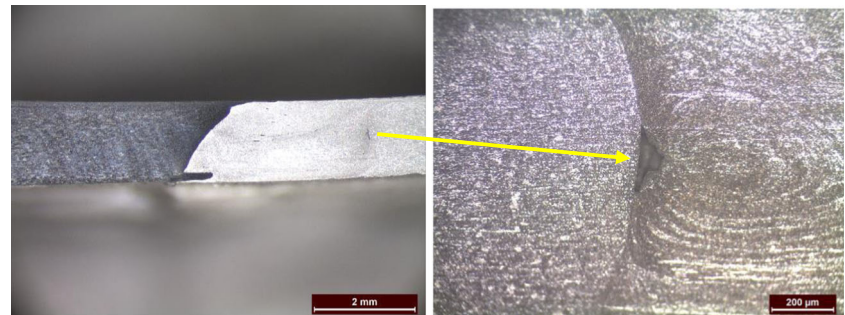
Optical macrograph and micrograph of the weld nugget of the 600 RPM specimen
